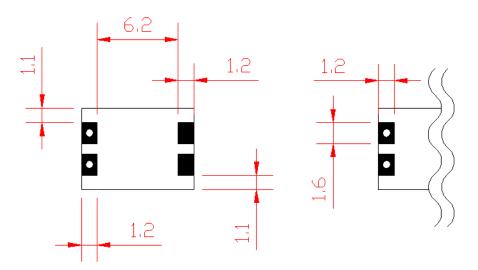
The M-BT-0911-PC Antenna PCB Land Pattern
